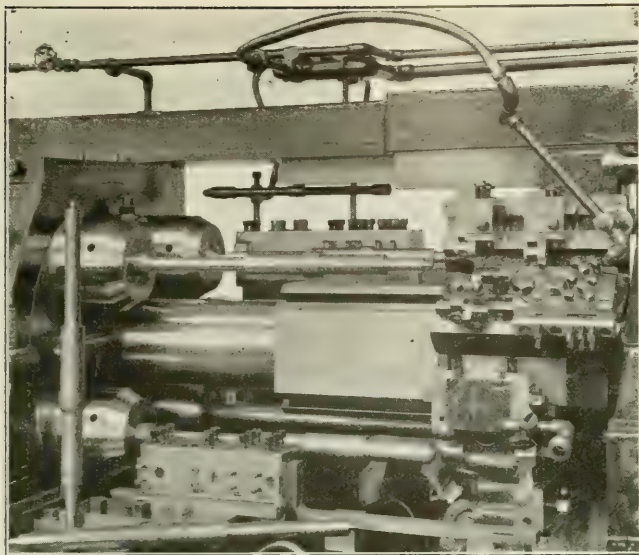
MACHINING A LONG SHAFT ON A MULTIPLE SPINDLE AUTOMATIC.
